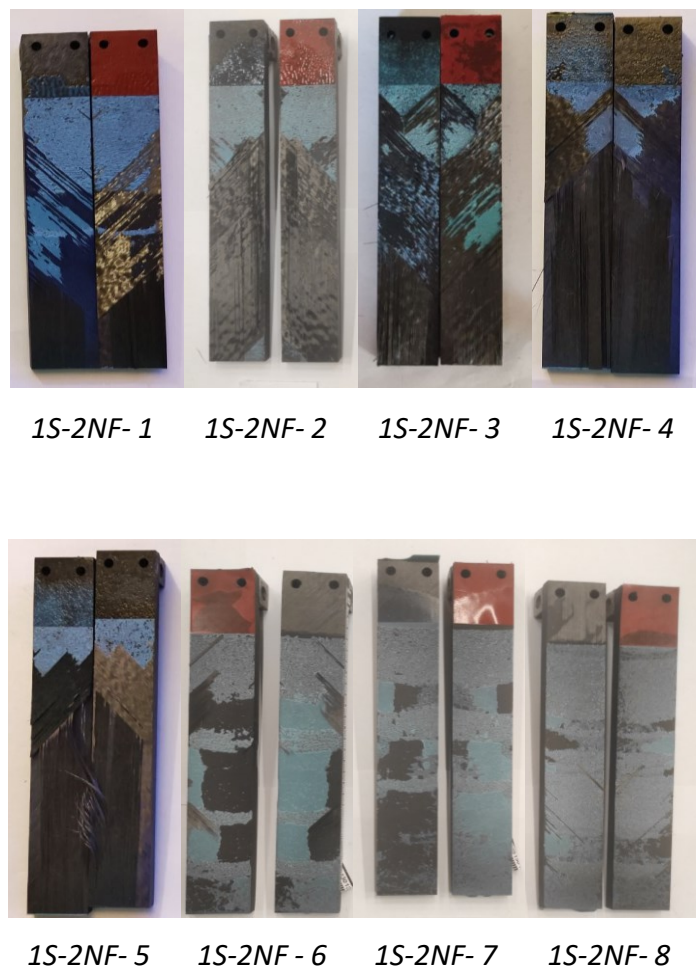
Fracture surface of 1S-2NF samples
